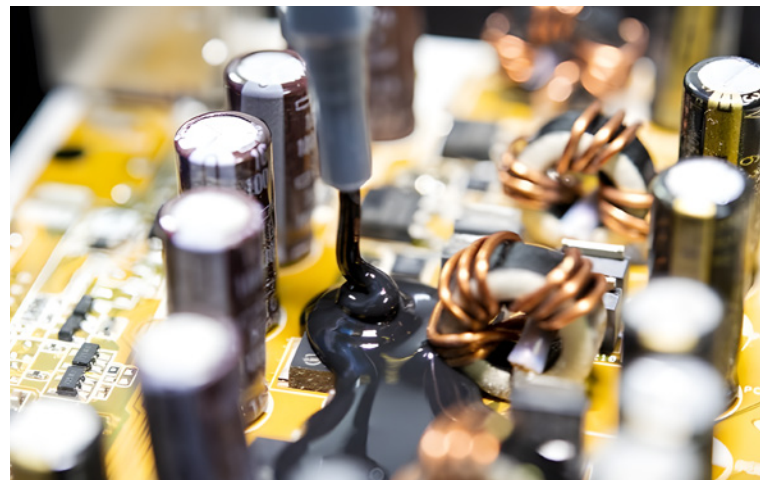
Controlled dispensing of potting material onto a PCB ensures complete coverage while minimizing air entrapment and defects.
